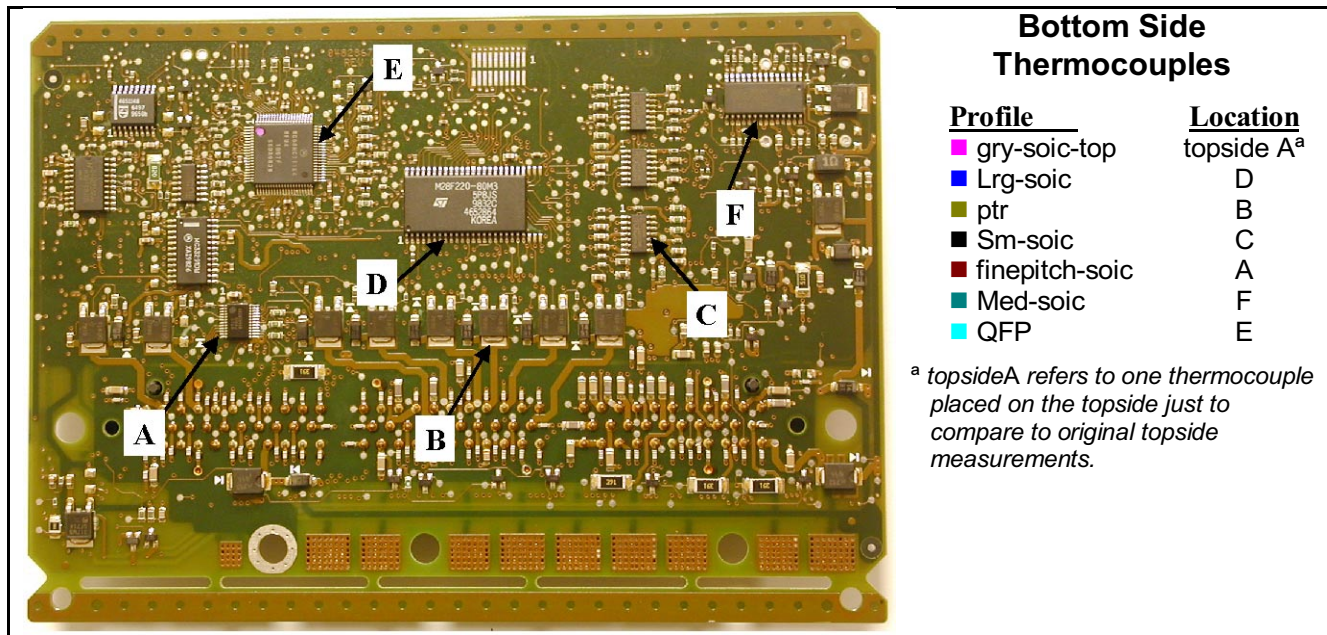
Test Vehicle Bottom Side with Thermocouple Location
